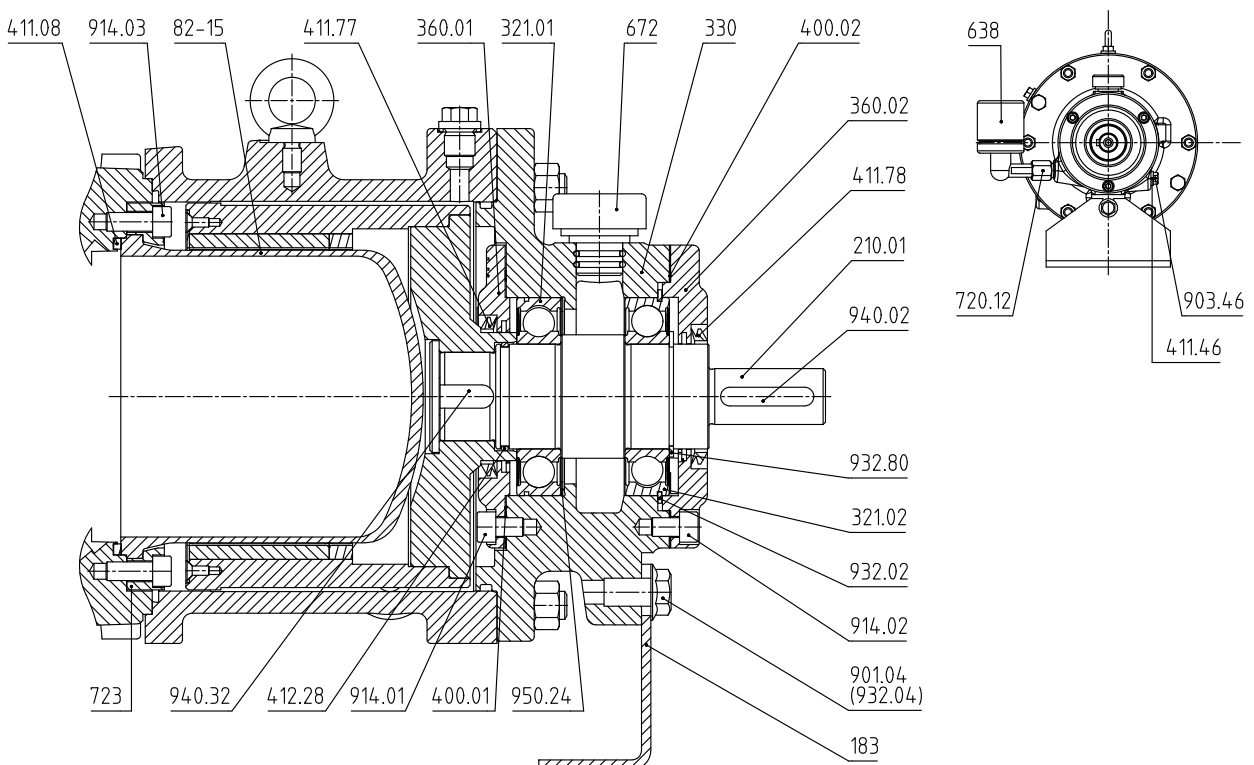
Model with bearing bracket with oil lubrication without shaft seal ring as leakage barrier
